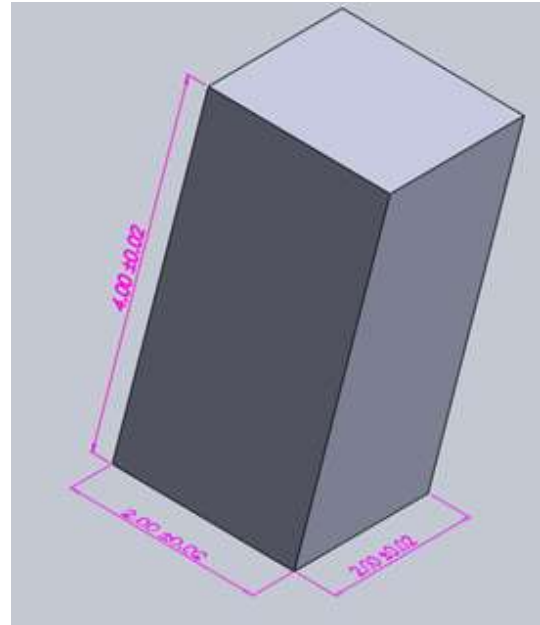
Modeling of the part manufactured in the 3D printer with the composite material used for compression (inch units)
